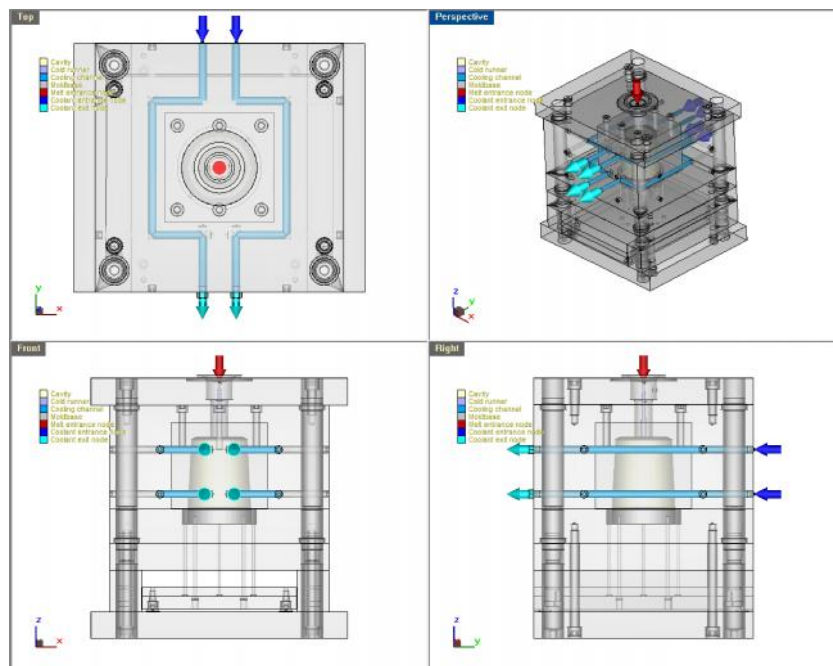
Making a mold cooling channels for a common parts (made in Moldex 3D)
